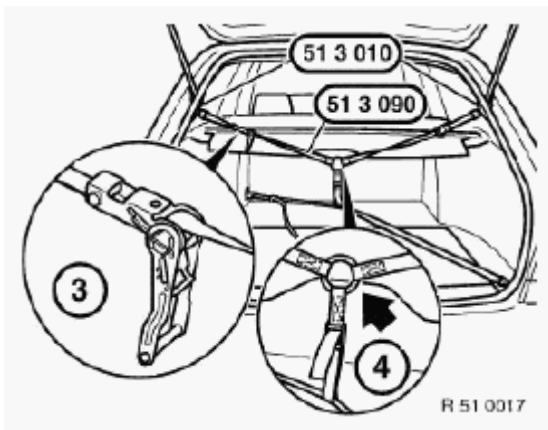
Special Tool (51 3 010) And (51 3 090)
